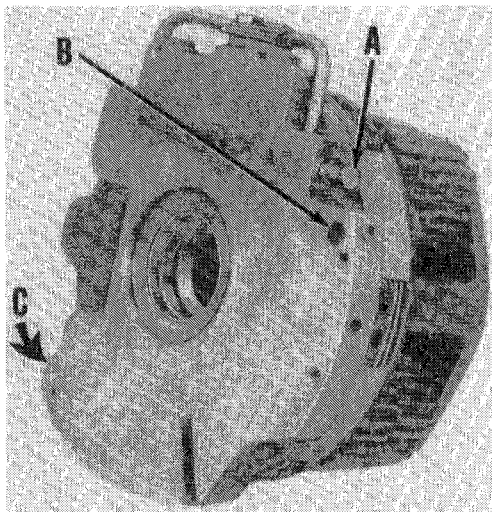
Brake and clutch piston operation may be checked by moving control valve (A) and applying compressed air at ports (B) and (C). Refer to text.
